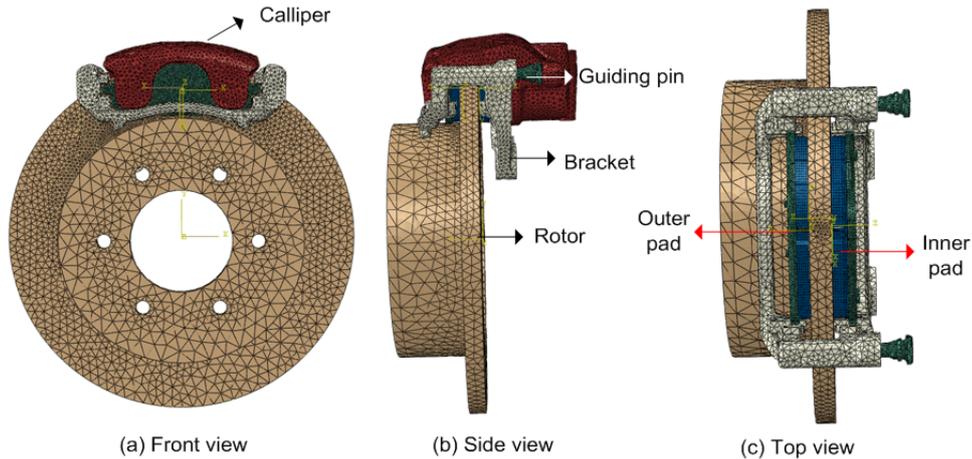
A FE full brake assembly model for brake squeal prediction (a) top view, (b) side view, (c) top view with the calliper not present to show the two pads
